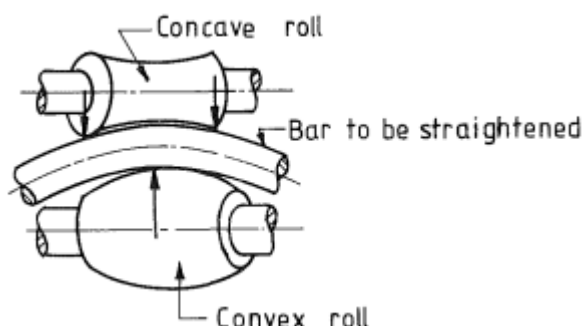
Bar Straightening in a two-roll "Air-Bend" machine
